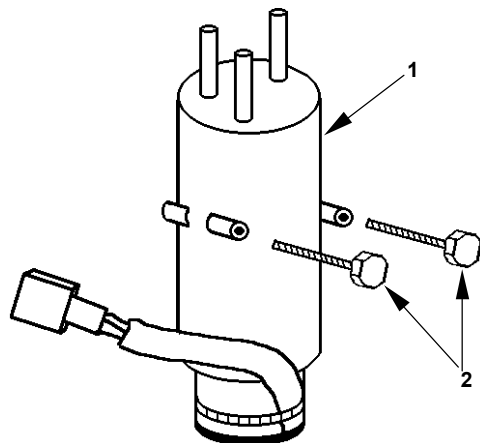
Valve Assembly*VALVE ASSEMBLY COMPONENTS
